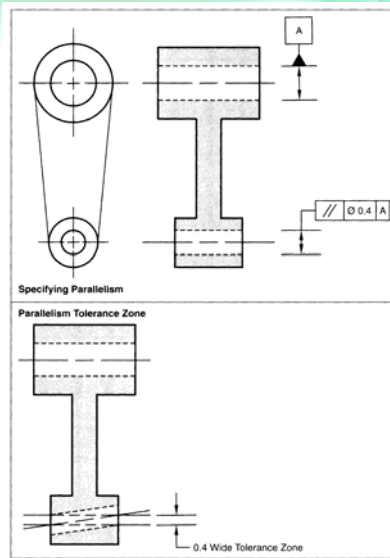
Parallelism tolerance applied to an axis
